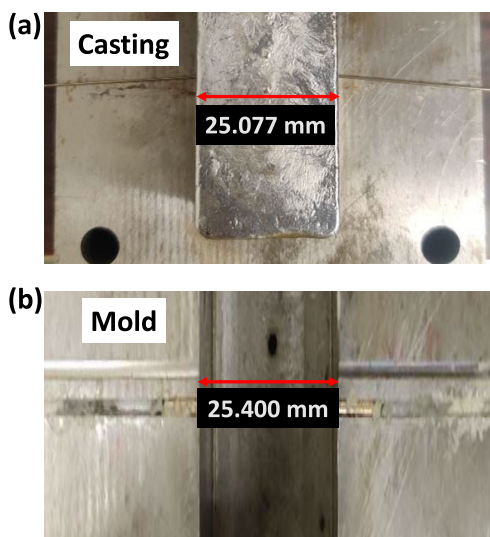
Images of casting and mold. (a) Image of the aluminum casting, with a measured length of 25.077 mm. (b) Image of the empty mold, with a measured mold cavity length of 25.400. A 0.323 mm difference is observed indicating the aluminum shrinkage during solidification process.
